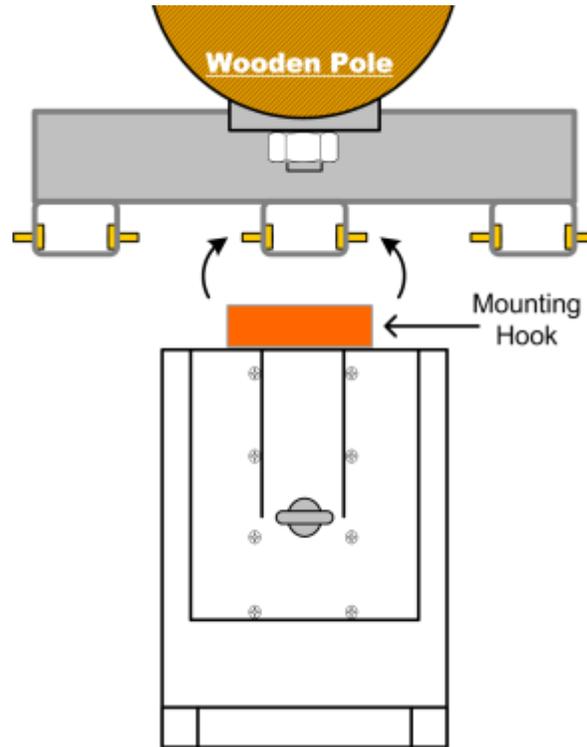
Single GX Installation (Mounted in Middle of Bracket) – Top View
